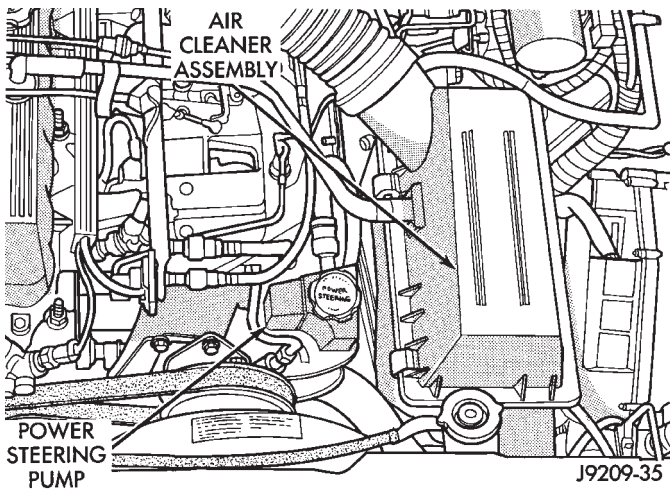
Air Cleaner Assembly & Power Steering Pump
